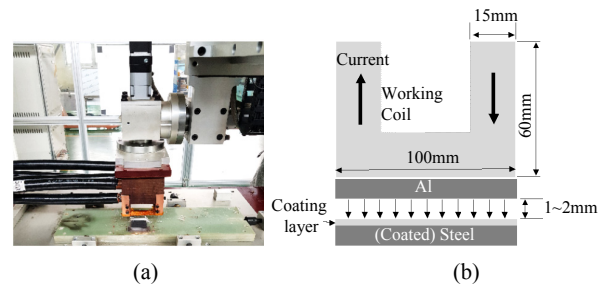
Schematic arrangement of EMPW (a) Head for electromagnetic welding (b) Specimen arrangement
